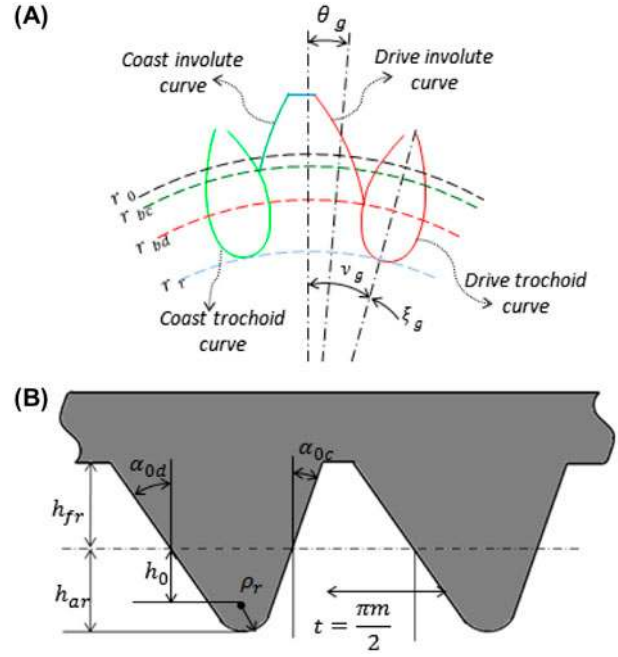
(A) Drive and coast sides of a gear tooth depicting the involute and trochoid profiles. (B) Asymmetric tool profile taken as reference for generating gears.
